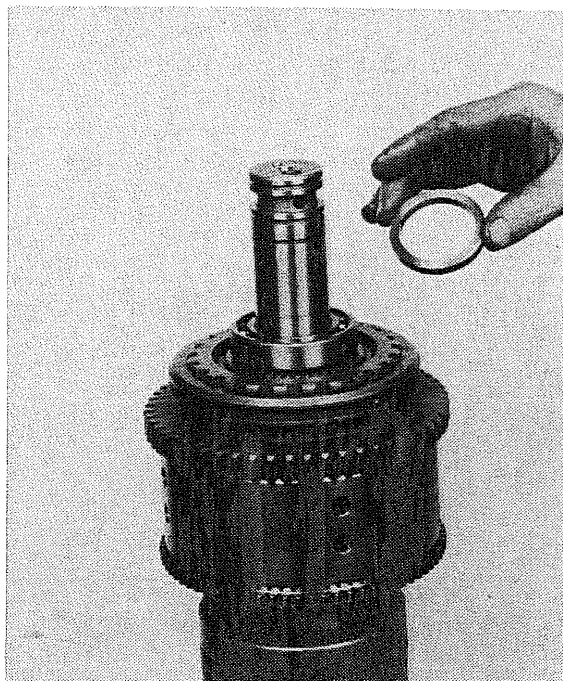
Assembly of the PFR Clutch (2 of 5)
